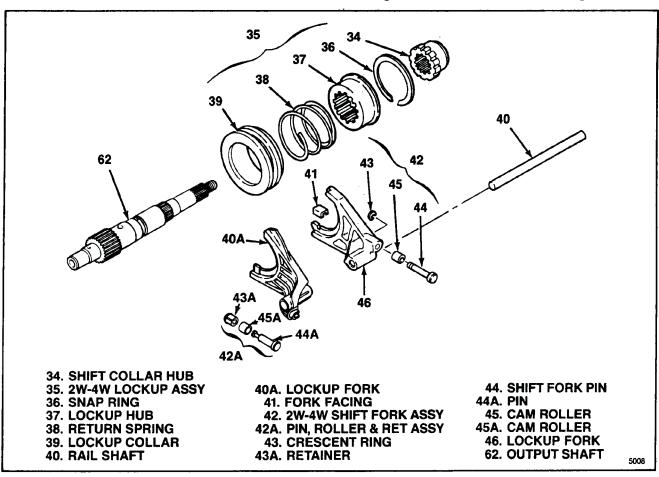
Lockup Shift Parts (Mechanical Shift)
